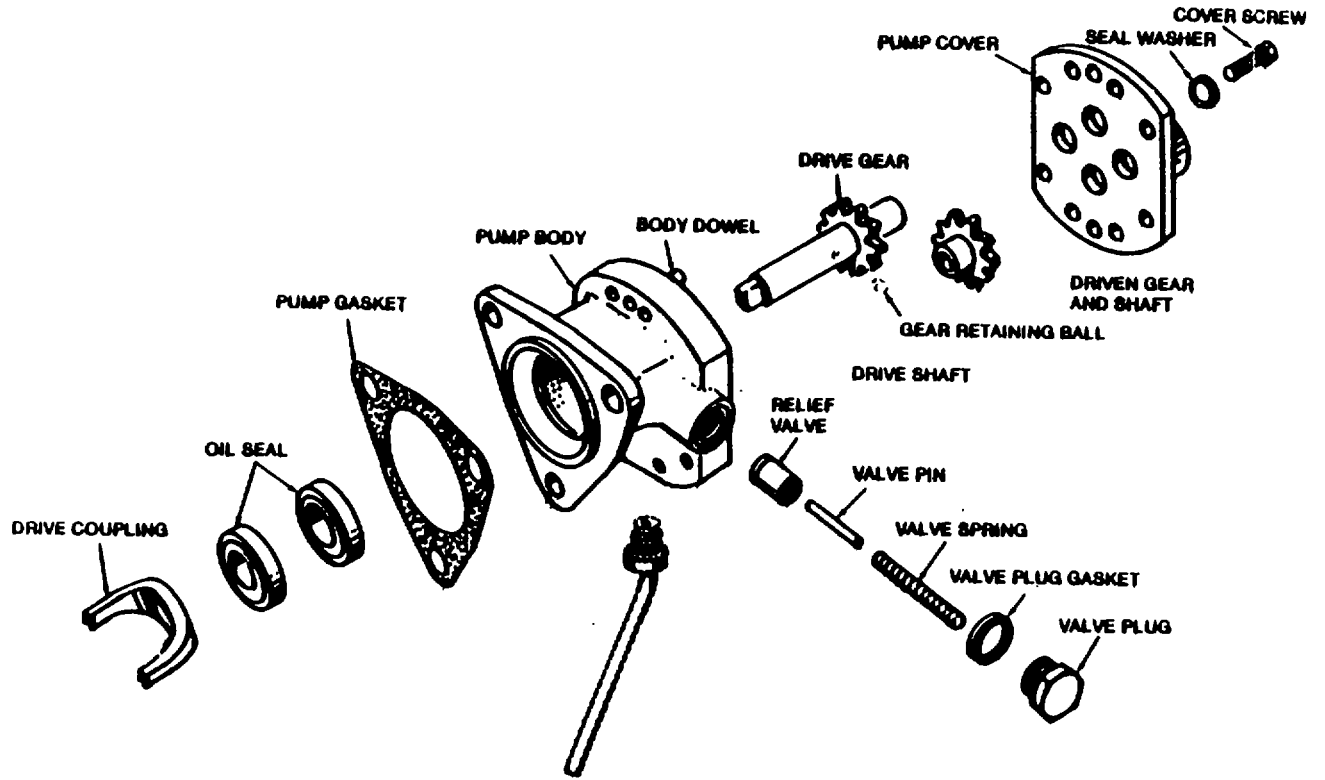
Fuel Pump Disassembly and Reassembly.
